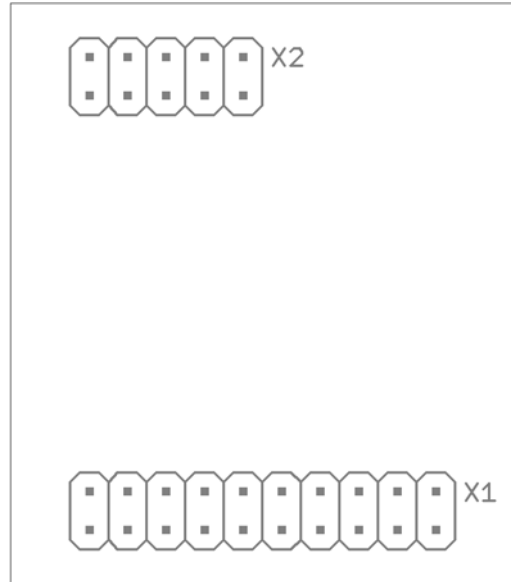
RF Test Module: bottom components (inverted and enlarged 2X)
